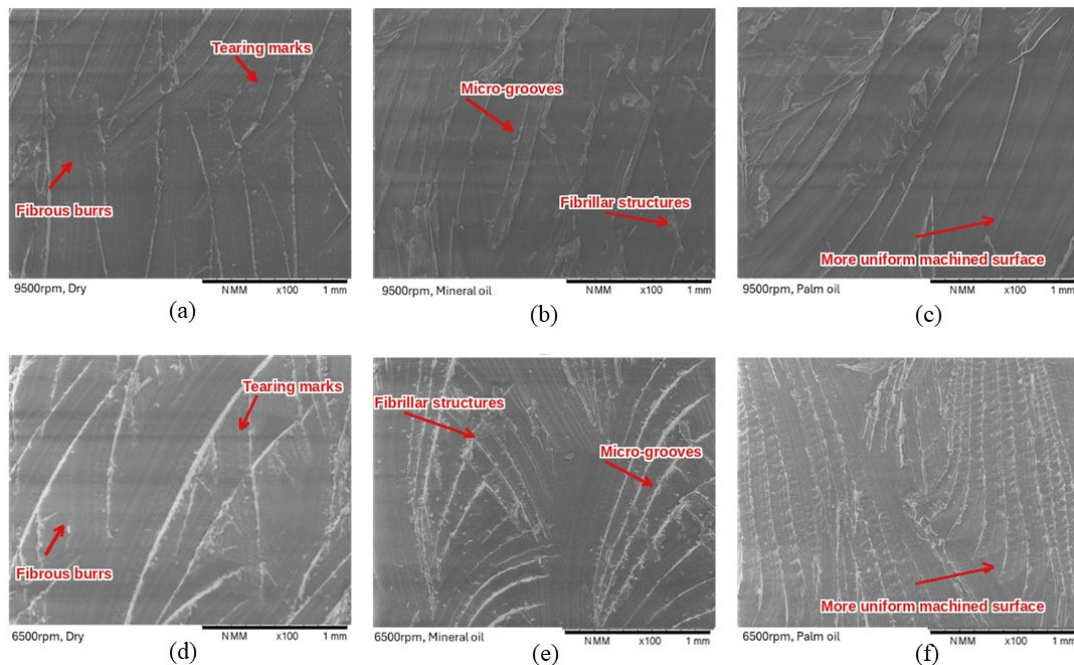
SEM images of machined UHMWPE surfaces under dry cutting (a) and (d), ISO VG 32 mineral oil (b) and (e), and palm oil lubrication (c) and (f) at spindle speeds of 6500 and 9500 rpm, showing tearing marks, fibrous burrs, fibrillar structures, and micro-grooves as indicated
